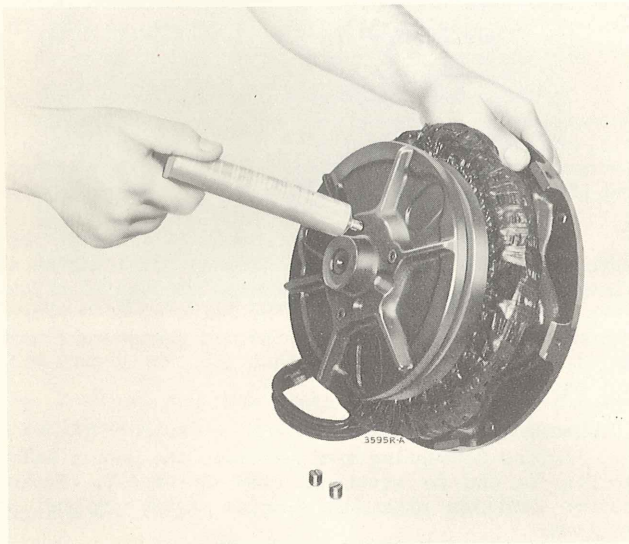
Method of Lubricating Rotor Bearing. Both Plugs Removed, Old Grease Being Forced Out
